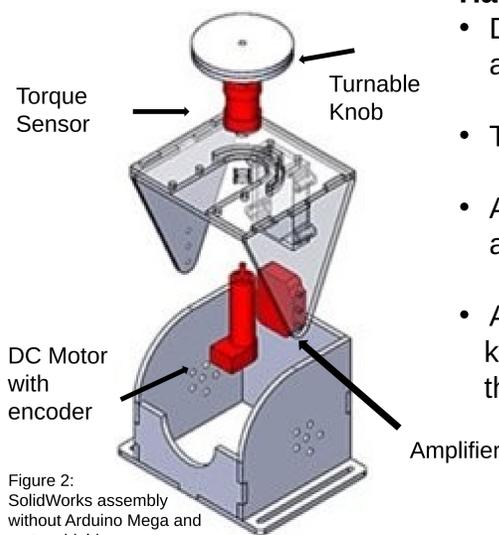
SolidWorks assembly without Arduino Mega and motor shield
